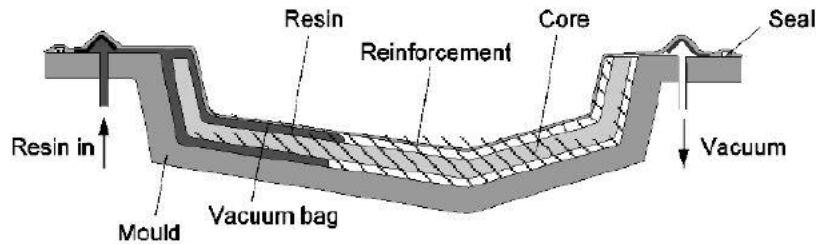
schematic vacuum assisted resin transfer moulding [53, p. 423]
